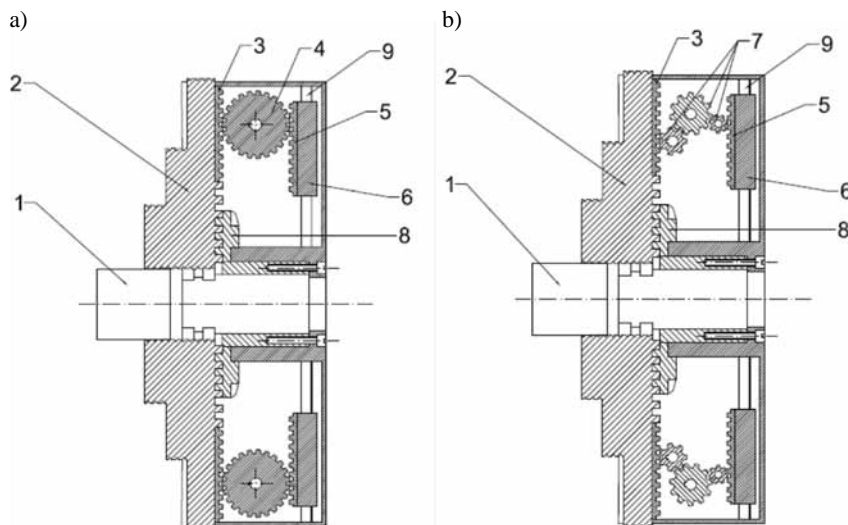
Lathe chuck with centrifugal compensation, a) with one gearwheel, b) with gearwheels (own development [5]): 1 – workpiece, 2 – jaw, 3, 5 – gear rack, 4 – gearwheel, 6 – counterweight, 7 – gear, 8 – scroll plate, 9 – guideways
